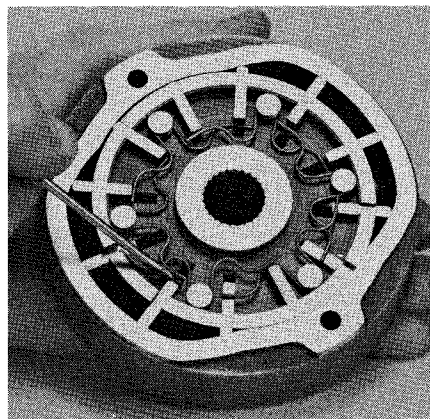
Be sure all vane springs are engaged behind the rotor vanes. Springs can be pried into place with screwdriver as shown.
